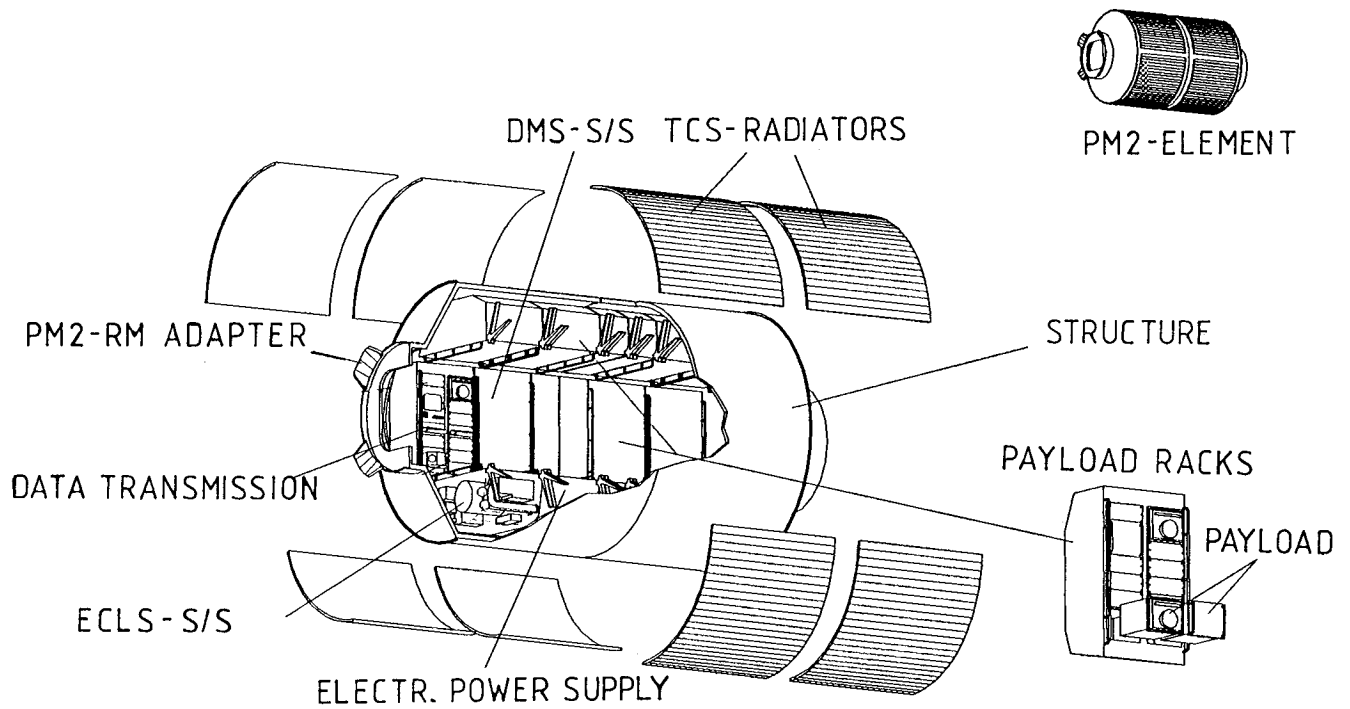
Pressurized Module (PM2-Element) Exploded View
